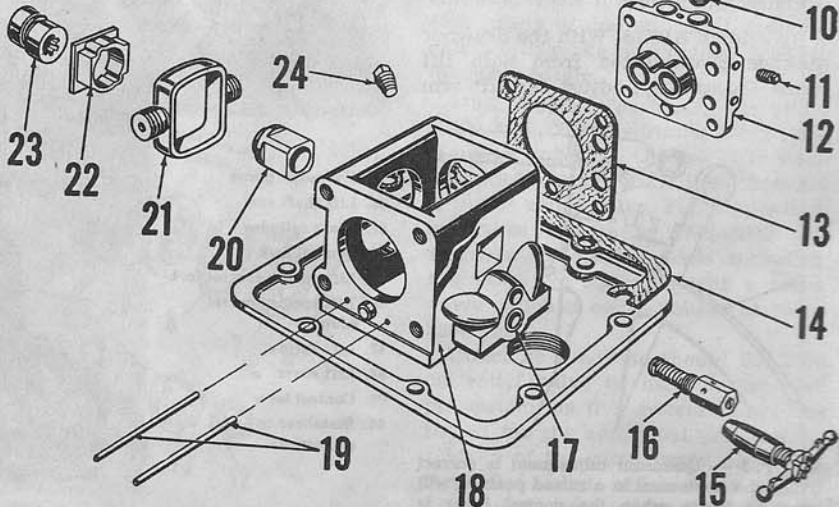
Models TE20 and TO20 hydraulic pump unit which does not have the control valve oscillator or "O" ring seals used on TO30 unit. Refer to Fig. F58 for TO30 pump unit.
